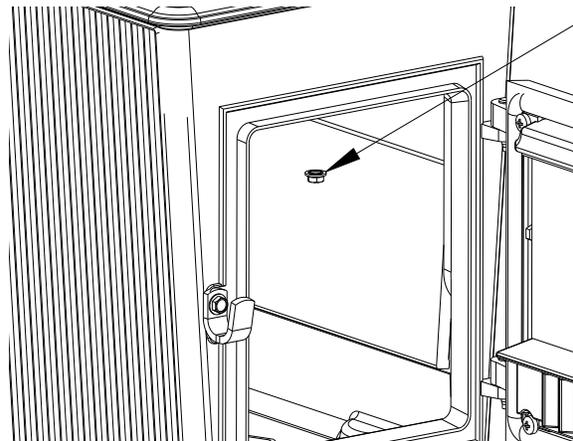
Remove both top plate nuts located inside the front door opening.
